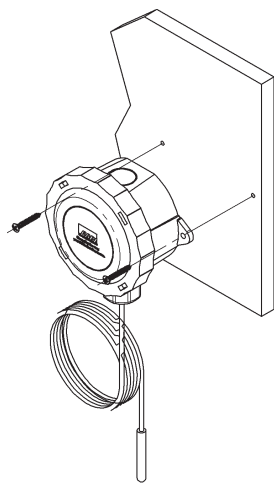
Stainless Steel Remote Probe with Weather Tight (EU, EUO) Enclosure
